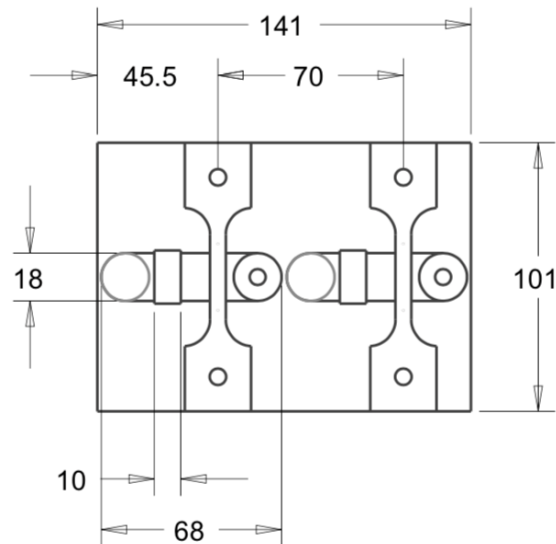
Aluminum Plate with sketches of the tensile specimens and friction stir processed regions (All units in mm)
